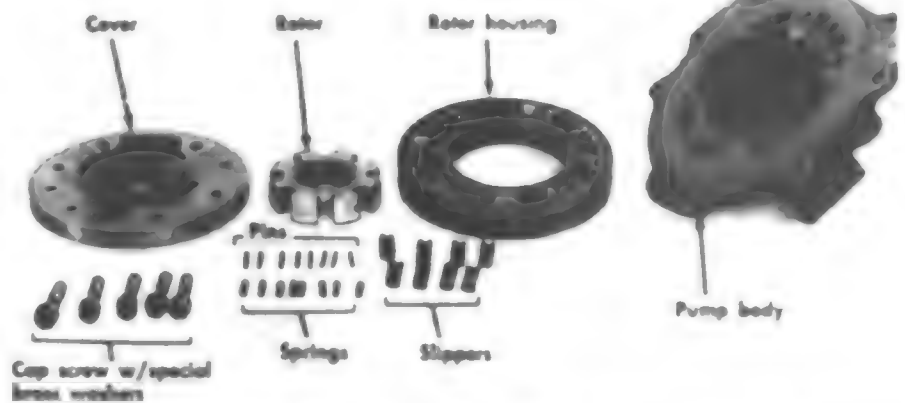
Exploded view of the charge and servo pump. Rotor housing seal rings (one used on each side) and the cover oil seal are not shown.
